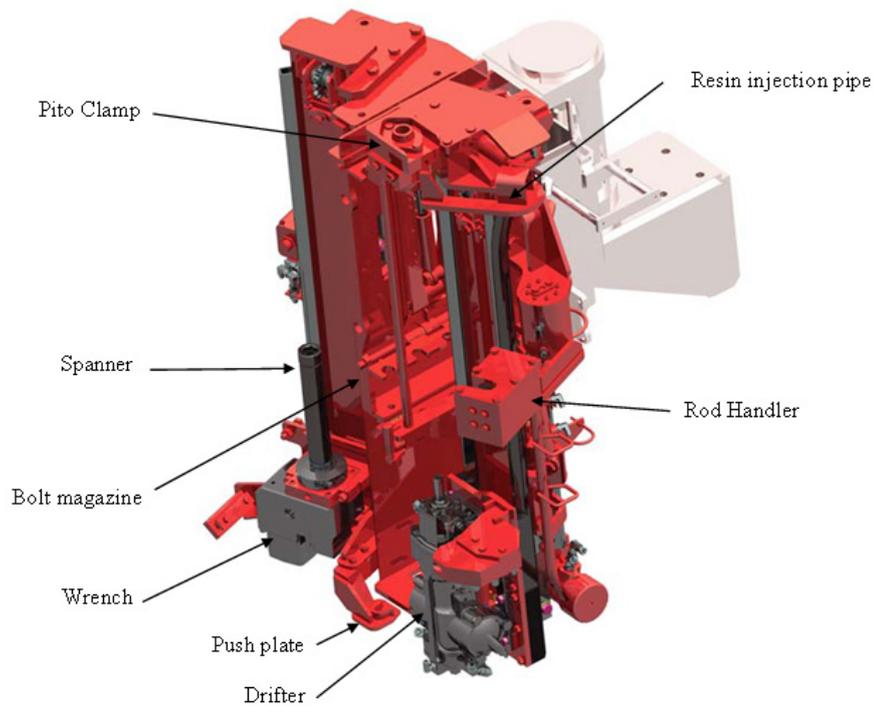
Current mechanized roofbolter (DS210L-M) bolting head
